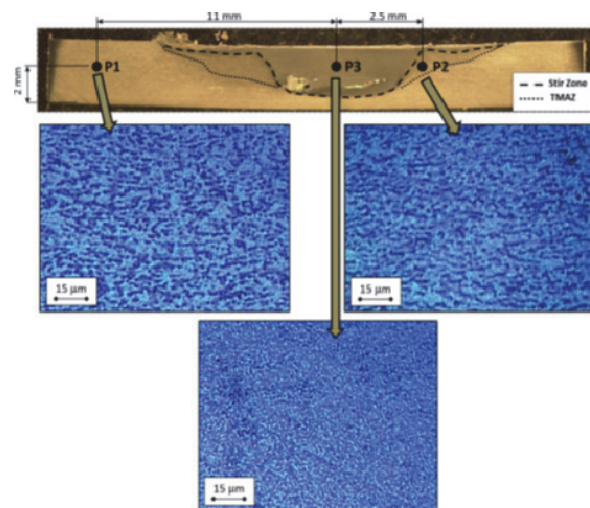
Butt joint weld section macrograph and micrographs (2 mm thick Ti-6Al-4V)
